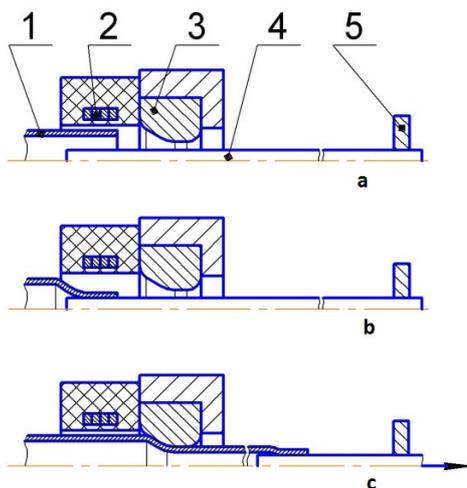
Scheme of compaction (a – starting state; b – stage of press-forging; c – stage of drawing): 1 – billet; 2 – inductor; 3 – drawing die; 4 – mandrel; 5 – puller
